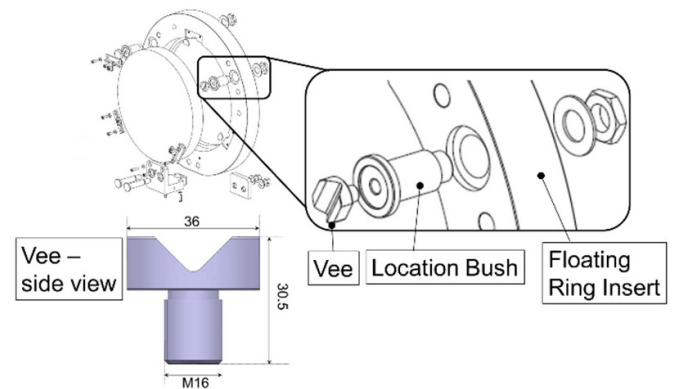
View of the Vee foot on its own (bottom left picture) with dimensions in millimetres and inside a close up of the Floating Ring assembly.
